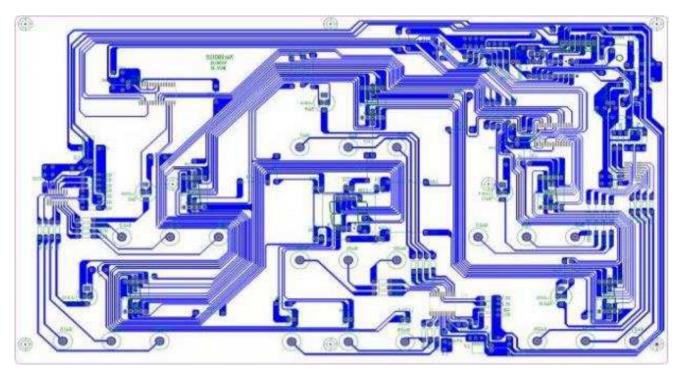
8 - PCB layout of Control PCB for models C96E-AAAAA02 and C96E-AAAAA03
